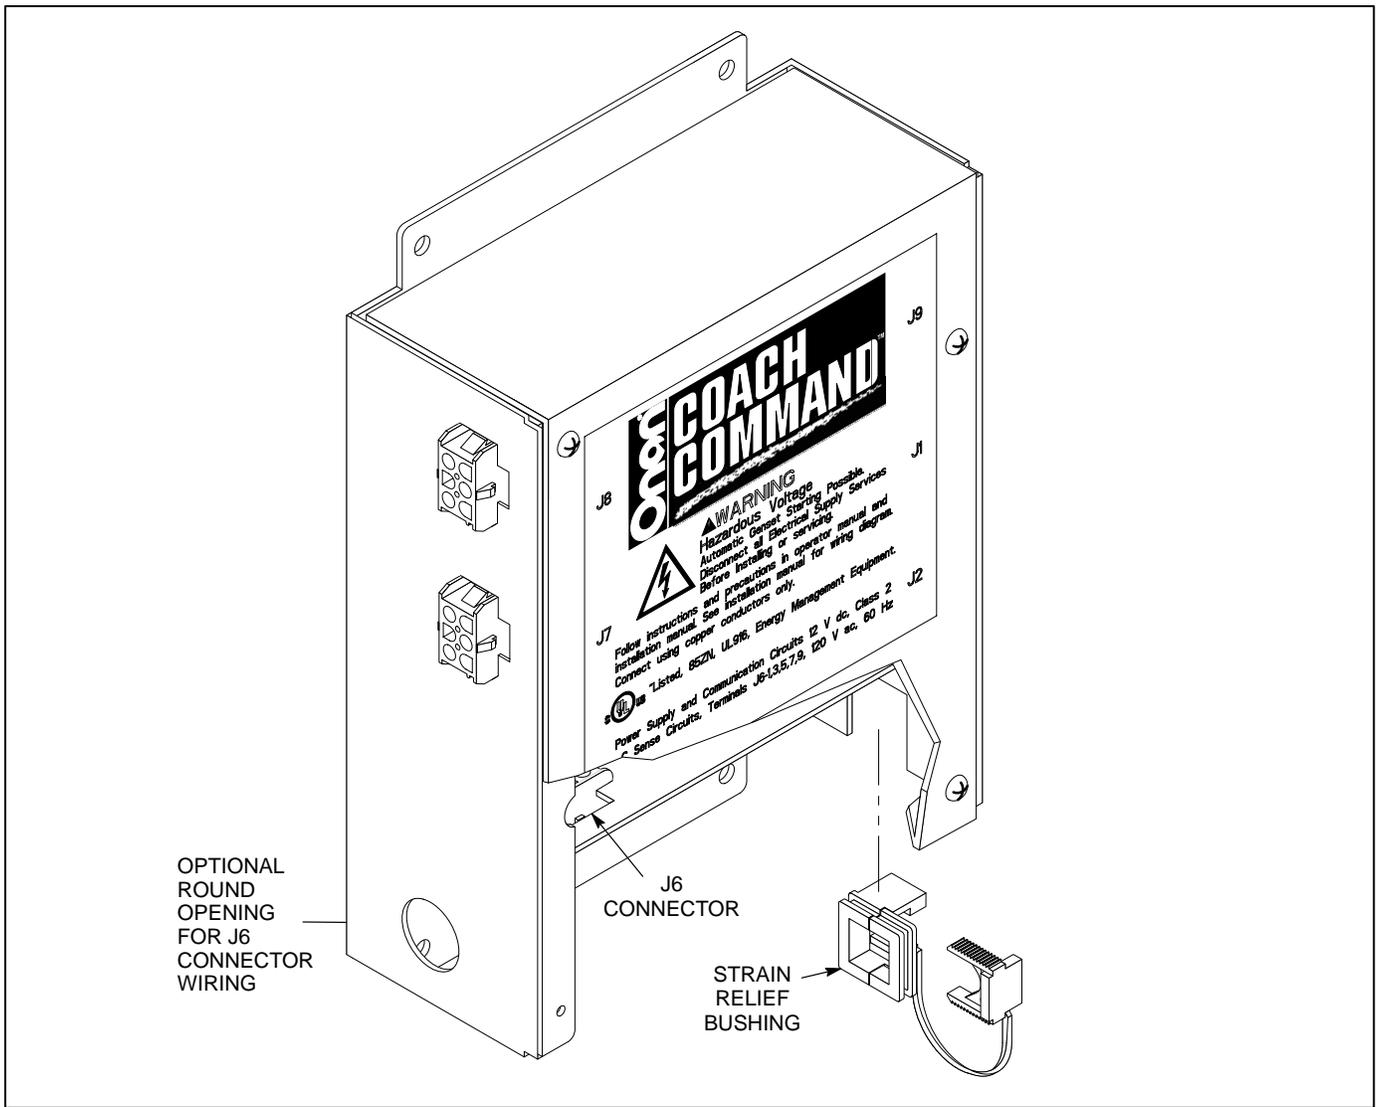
TRANSFER SWITCH NODE– J6 CONNECTOR WIRING INSTALLATION
